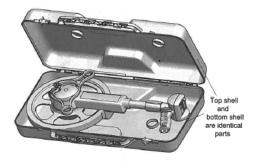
Identical large housing halves. Identical halves can reduce tooling costs and simplify assembly. (Used with permission of Meter-Man, Inc.)
